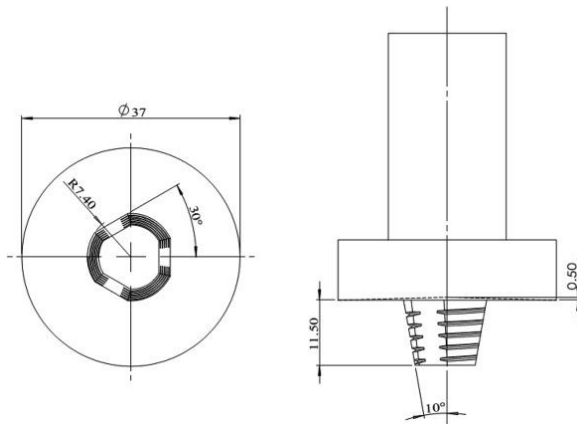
Schematic drawing of the FSW tool used in the study. All dimensions given in mm.
